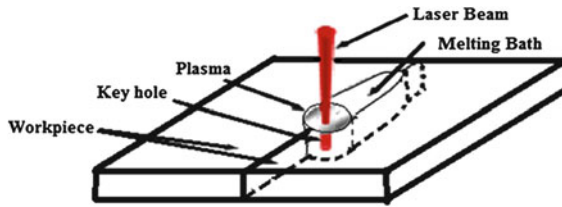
Keyhole and plasma formation during laser welding (Belhadji et al. 2010)
